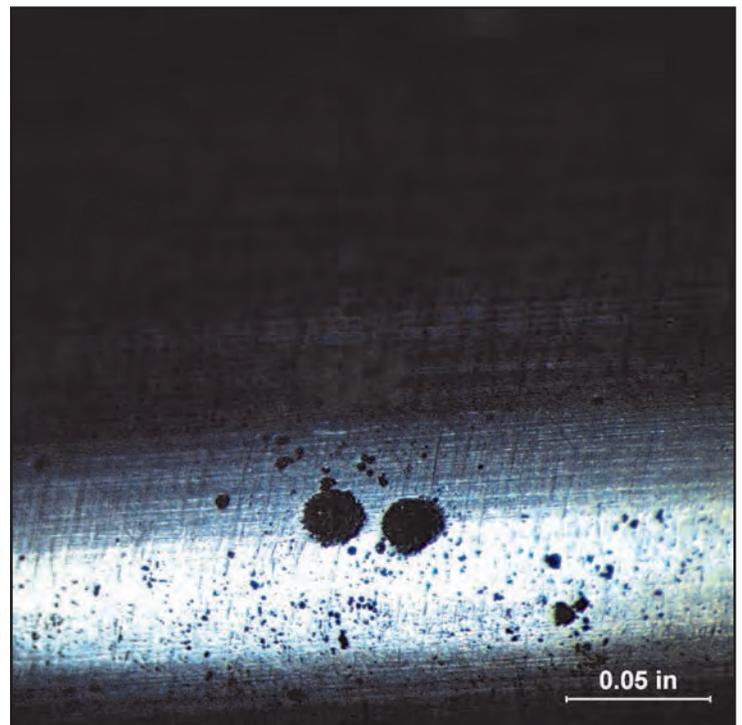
Closer view of pitting on GE 7FA compressor blade.
